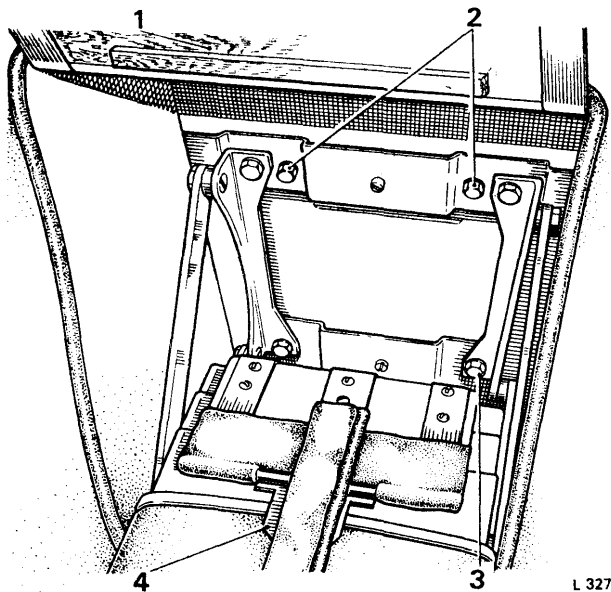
POSITION OF THE REAR SEAT BACKREST SECURING SETSCREWS
